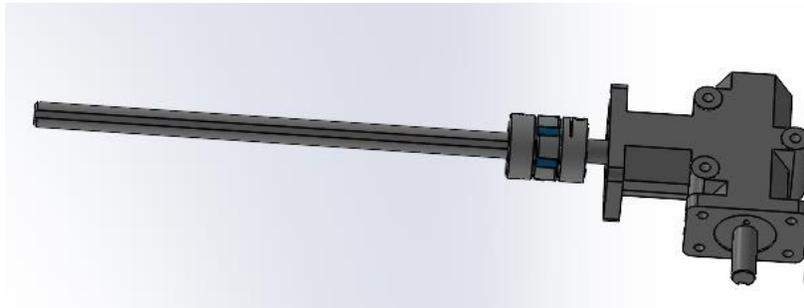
Drive Shaft, Coupler, and Gearbox Connection
